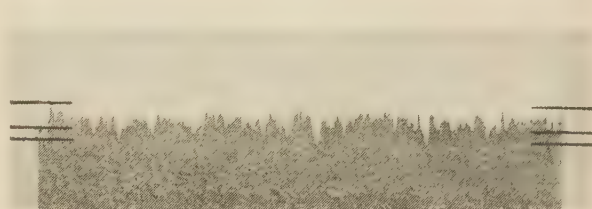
TAPER SECTION OF CYLINDRICAL SURFACE FINISHED BY GRINDING
